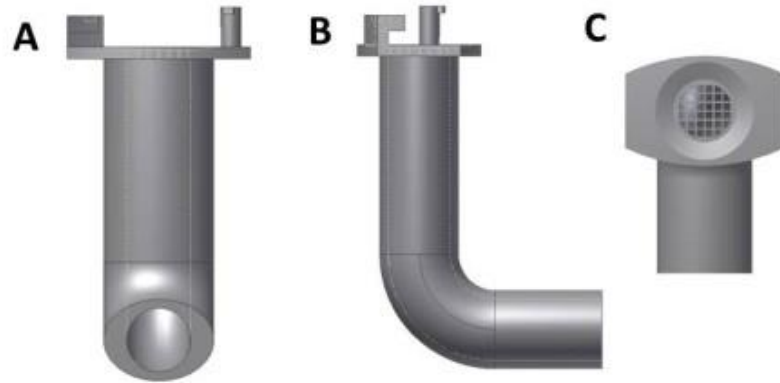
A) Bent Tube; B) Side View of Bent Tube; C) Top View of Bent Tube
